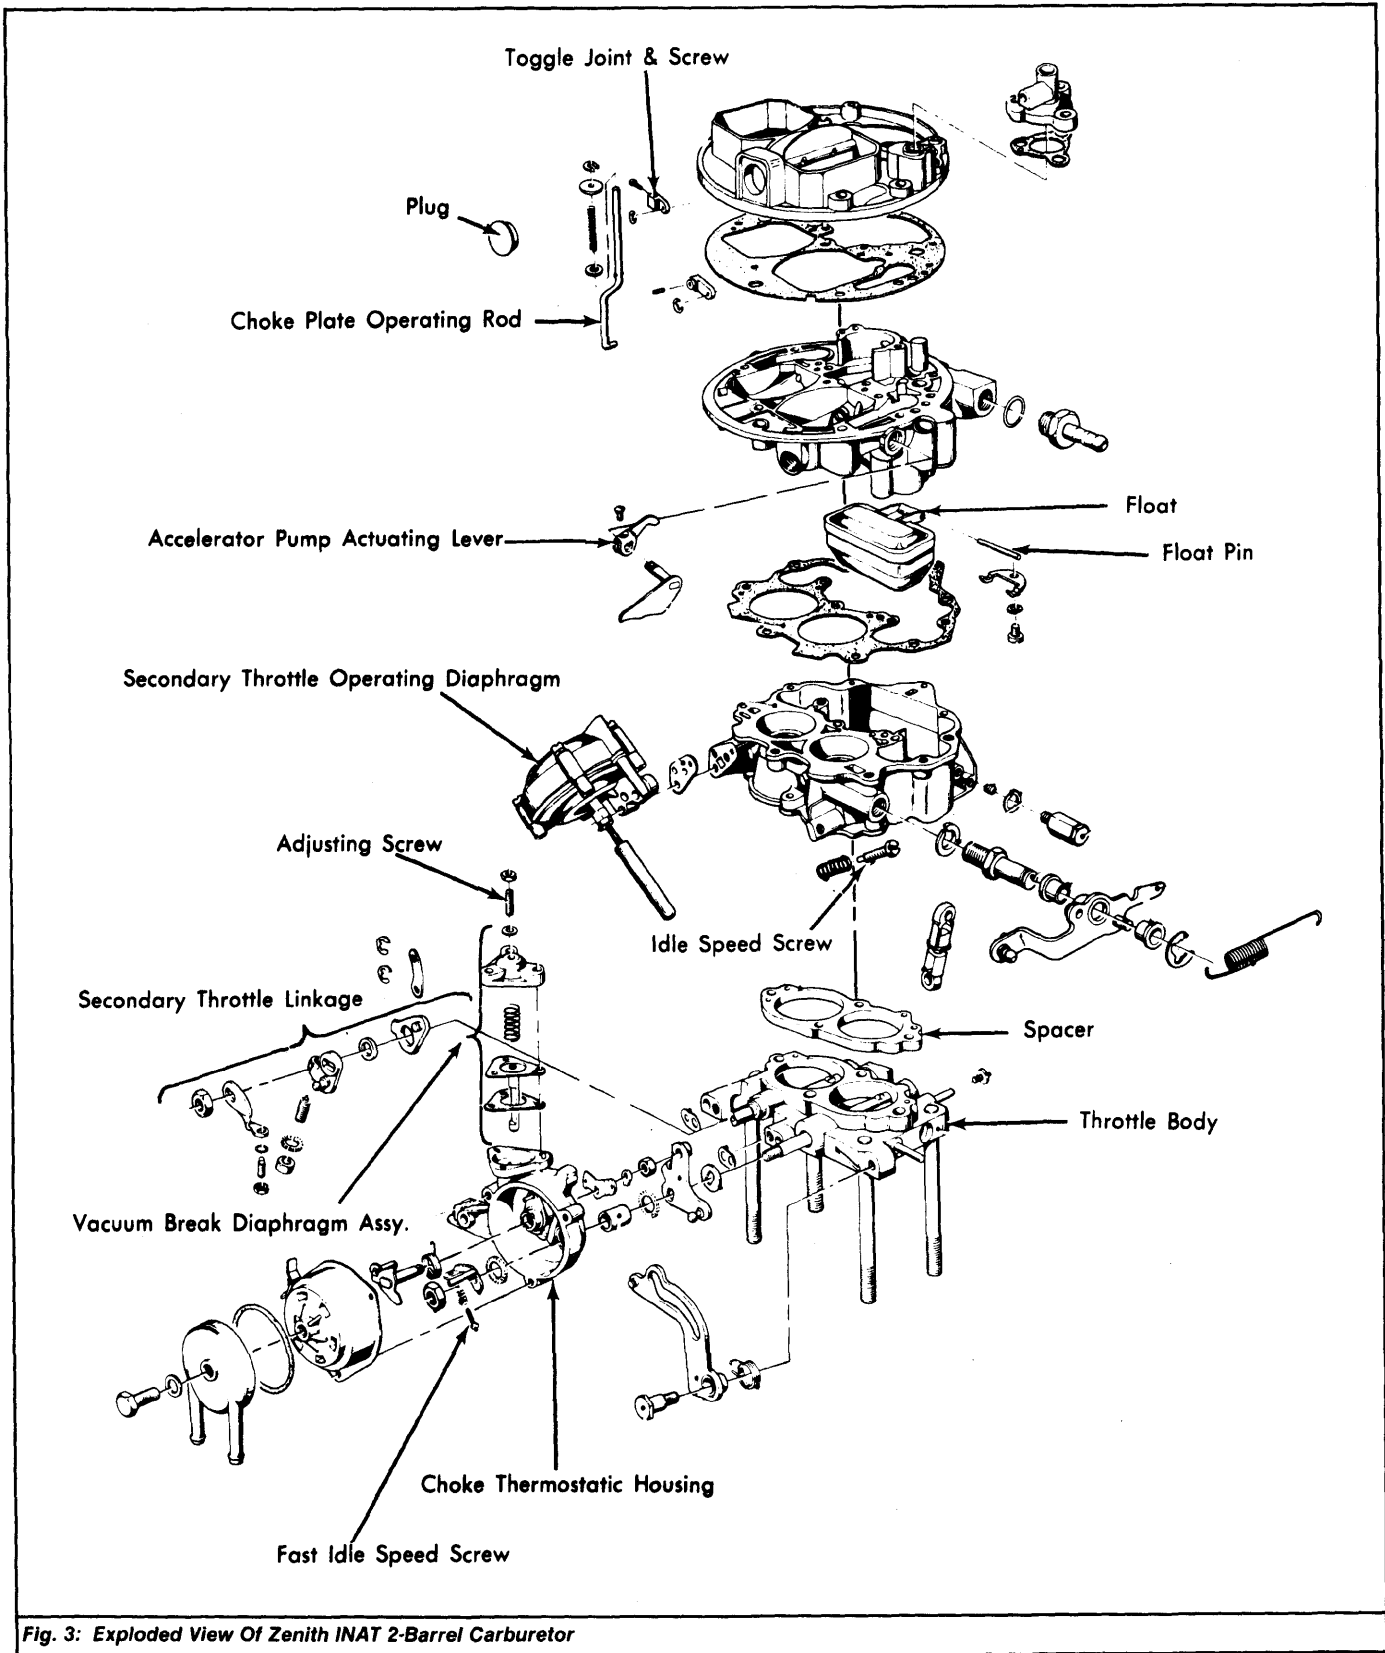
Exploded View Of Zenith INAT 2-Barrel Carburetor
